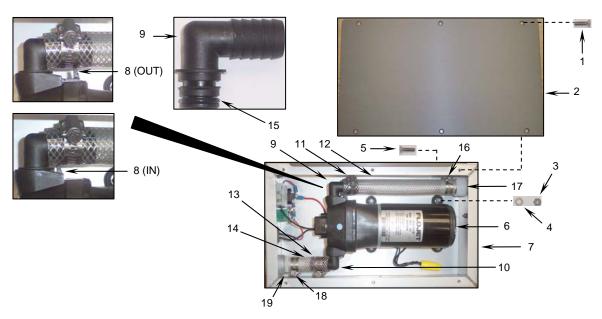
Removing the Sink Fill Pump Assembly Internal Tubing.
